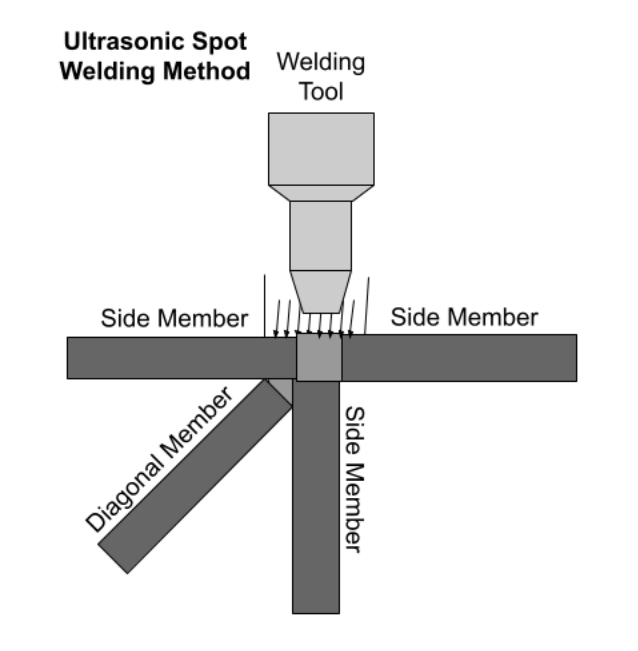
Ultrasonic Spot Welding Method [1]
